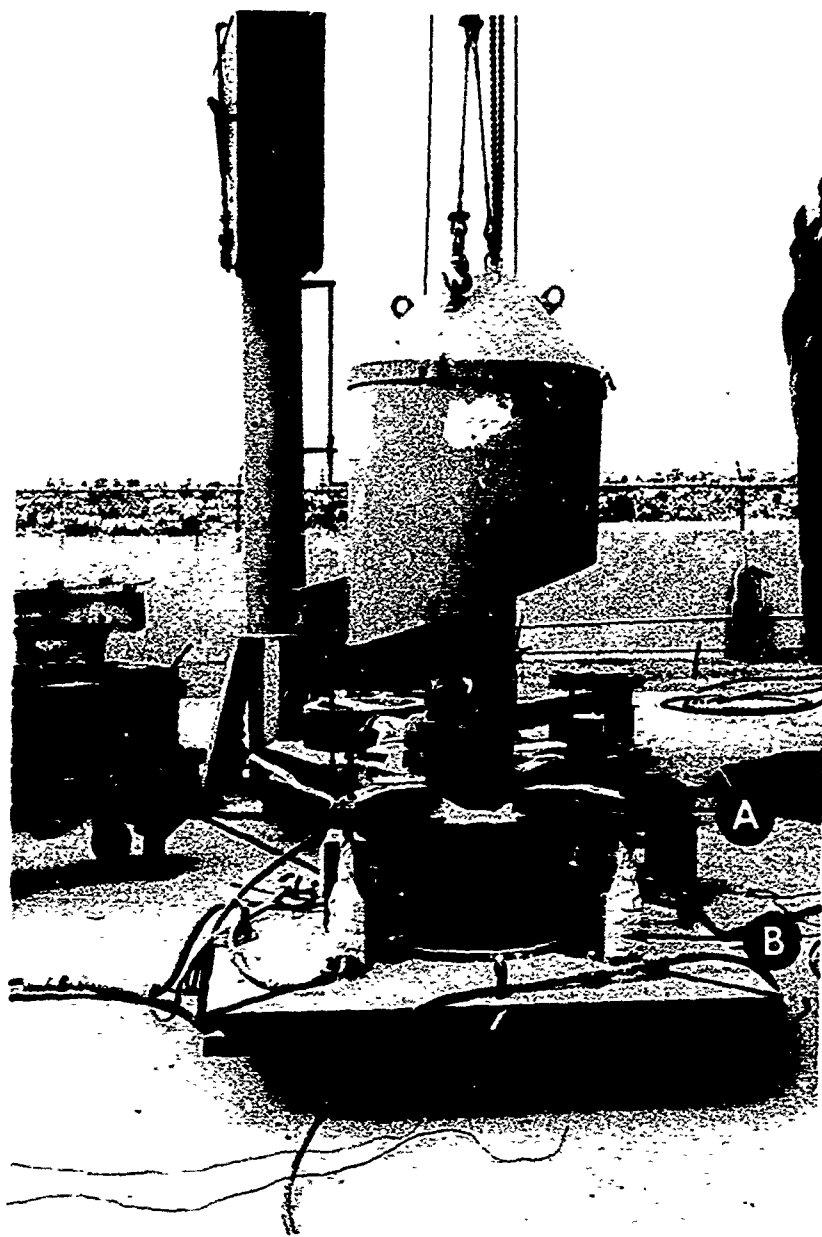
A Complete Explosive Forming Set-up Prior to improving Holding Fixture and Hydraulic Hand Pump
